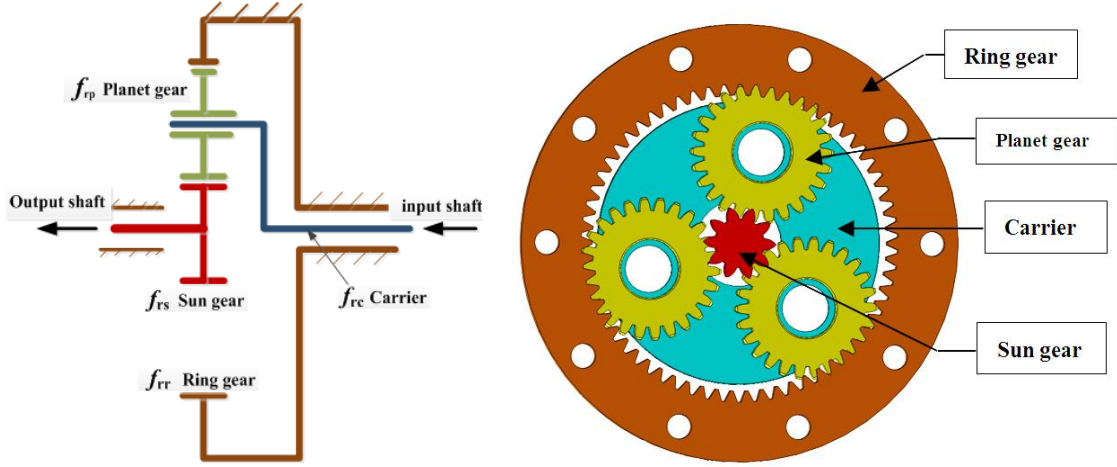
Schematic of a planetary gearbox with its standstill ring gear
